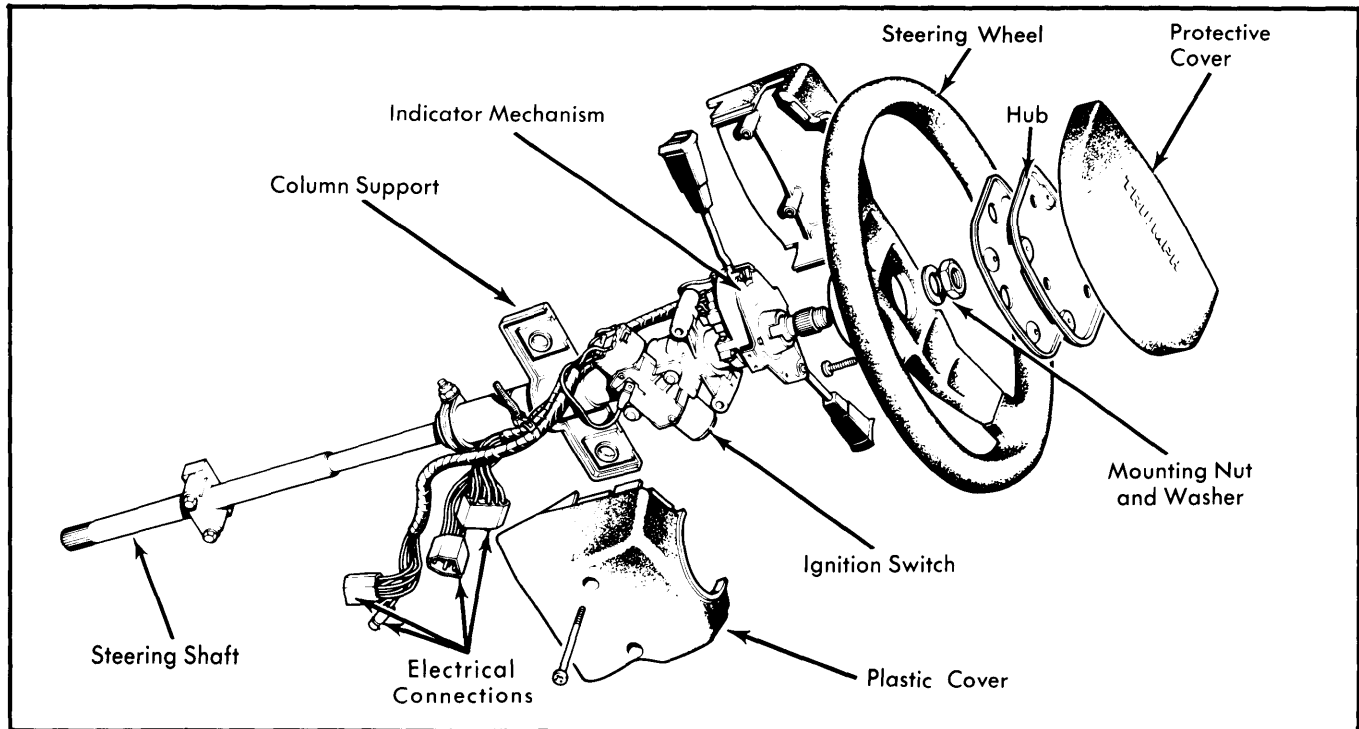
Partially Disassembled View of TR7 Upper Steering Column
